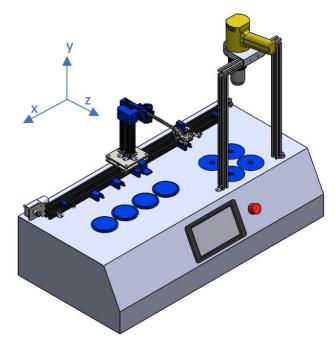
3D CAD developed for the sorting and palletizing machine.
